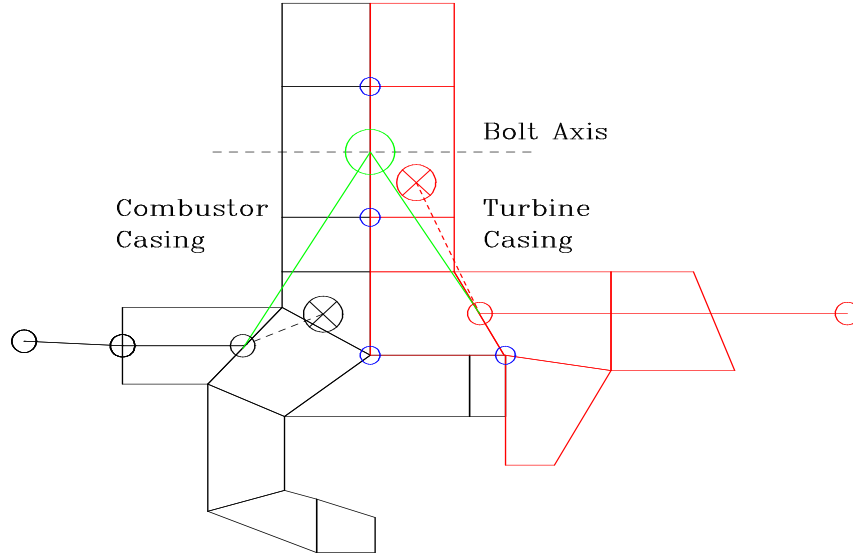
Cross-section of Joint Model for the Reduced Assembly
